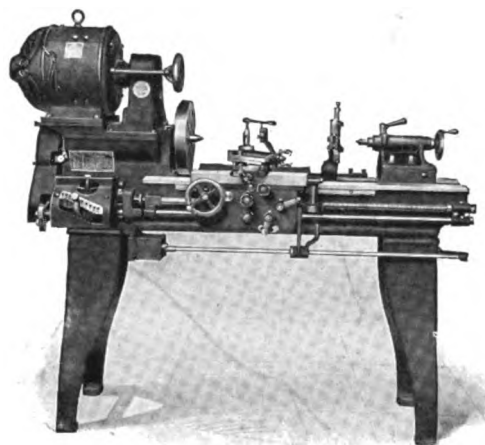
Monarch 12-Inch Variable Speed Motor Driven Lathe
